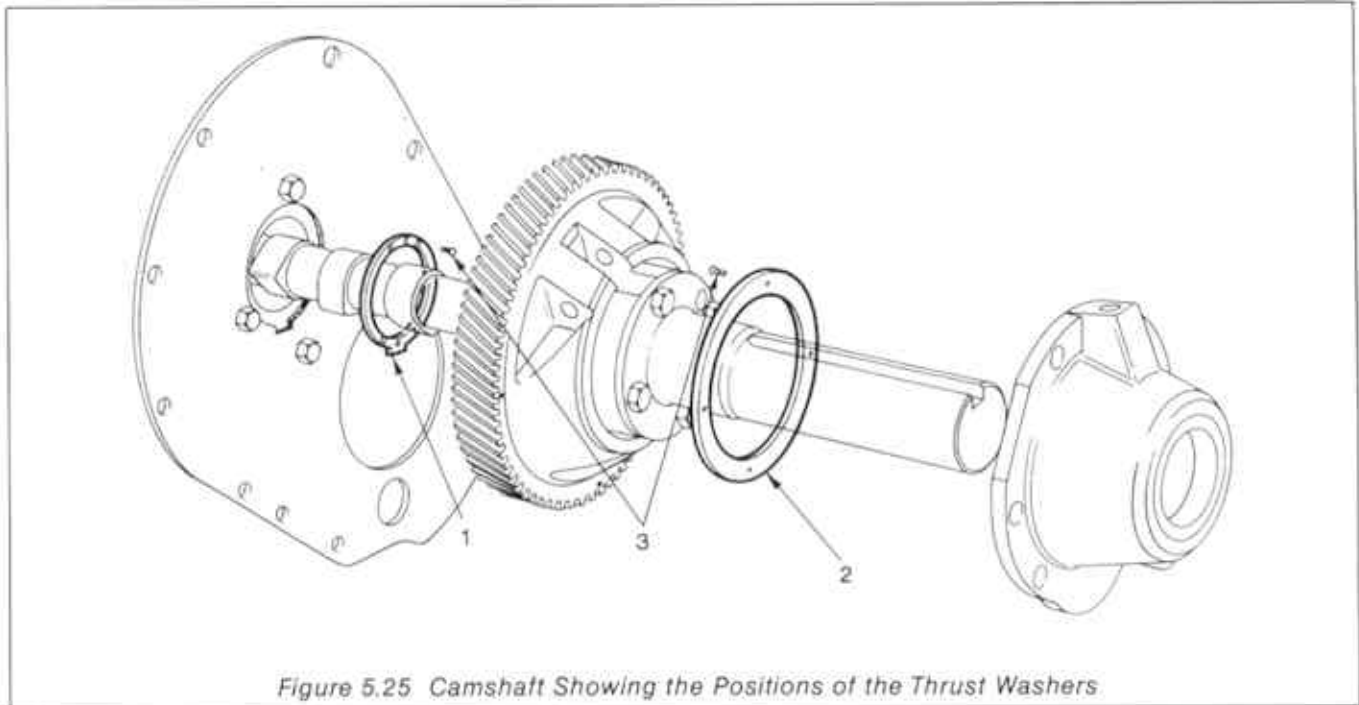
Camshaft Showing the Positions of the Thrust Washers
